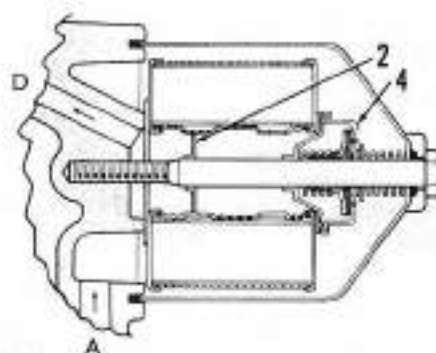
Cross-sectional view of oil filter. When pressure difference between inlet (A) and outlet (B) exceeds 10 psi, by-pass valve (4) opens to allow unfiltered oil to flow past filter. Locating plate (2) should be tight fit on cap screw.
